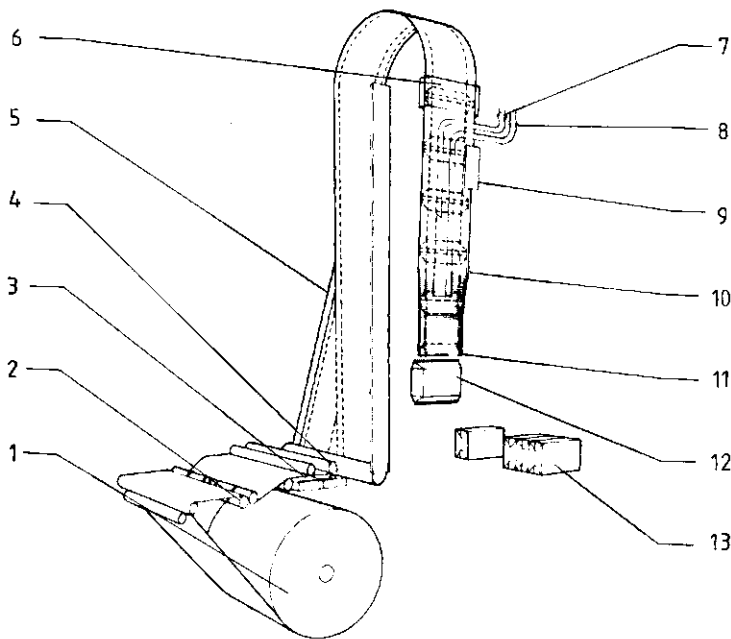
Tetra Brik aseptic filling machine. From a roll (1), the packaging material passes between two rollers (2) which make the creases along which the top and the bottom of the carton are formed. Then, the packaging material passes between two rollers (3), the lower of which is located in a sterilizing bath. This contains hydrogen peroxide, which is applied to the inside of the packaging material. Two squeeze rollers remove most of the sterilizing hydrogen peroxide liquid (4). Proceeding upwards (5), the packaging material is folded double along the middle, and the inside of the material is covered by a stainless steel lamina. The chamber thus formed is under a constant pressure of sterilized hot air (approx.  $125^{\circ}\text{C}$ ), which evaporates the hydrogen peroxide remaining on the inside of the packaging material, preventing the entry of unsterile air from the premises. After the packaging material passes the highest point of the machine, creases are produced (6) along which the top and the bottom flaps of the carton, as well as its vertical edges, are formed. Sterilized air is blown into the folded paper tube through a pipe (7), so entry of unsterile air is prevented. Milk is introduced into the paper tube through a filling pipe (8), which emerges below the liquid level in the paper tube to prevent foaming; the level is regulated by a probe (10). The double-folded paper web is sealed by induction heat between two sealing jaws (11). Immediately prior to sealing, the carton is embraced by two plates which determine the amount of liquid in the carton and contribute to shaping it (12). The filled and sealed cartons are moved towards the discharge end of the machine, their top and bottom flaps being folded and sealed in the meantime (13). Courtesy: Tetra Pak International AB.
